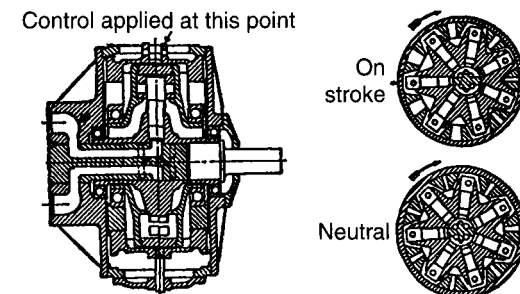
Radial-piston pump. Courtesy Hele-Shaw.
